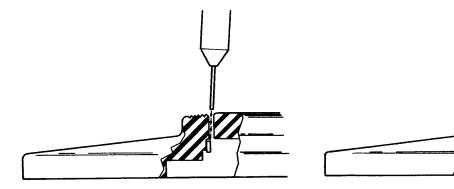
Insertion. End of Standard Escutcheon Tool Engages Edge of Latching Tab and Forces it Downward.
